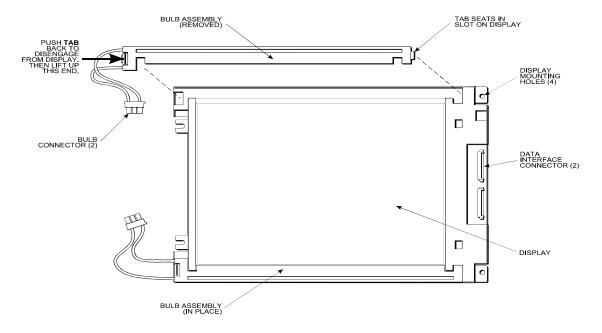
Model #KCS077VG2EA-A03 Bulb Assembly Removal
